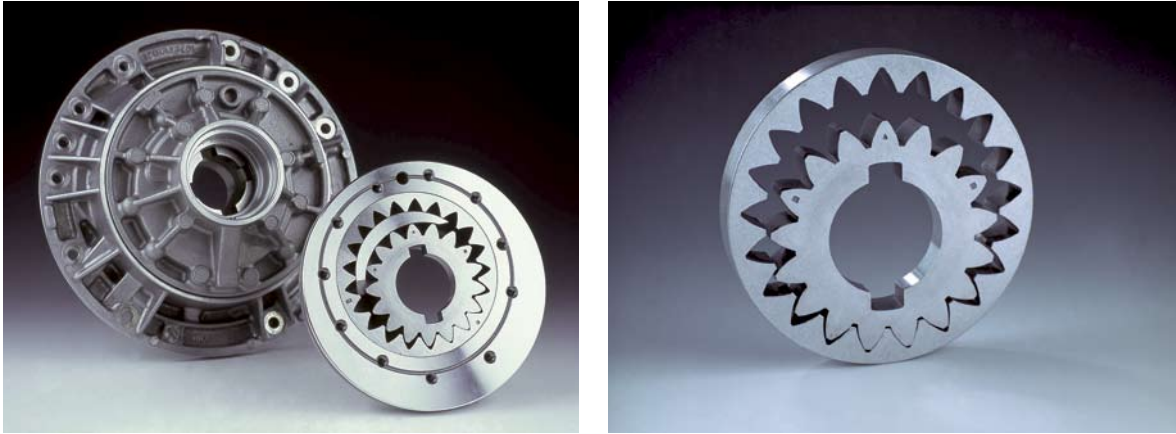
Aluminium oil pump for automatic gearbox with a rotor set sintered from AlSi14CuMg (ZF Getriebe GmbH).
